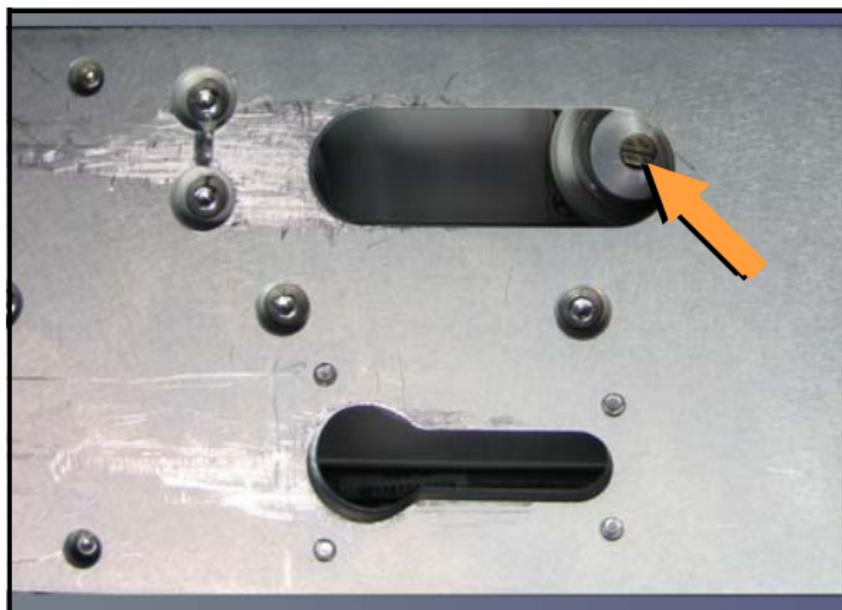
The bottom of a Programmer Module allows access to the actuating screws when power to the programmer is unavailable.
